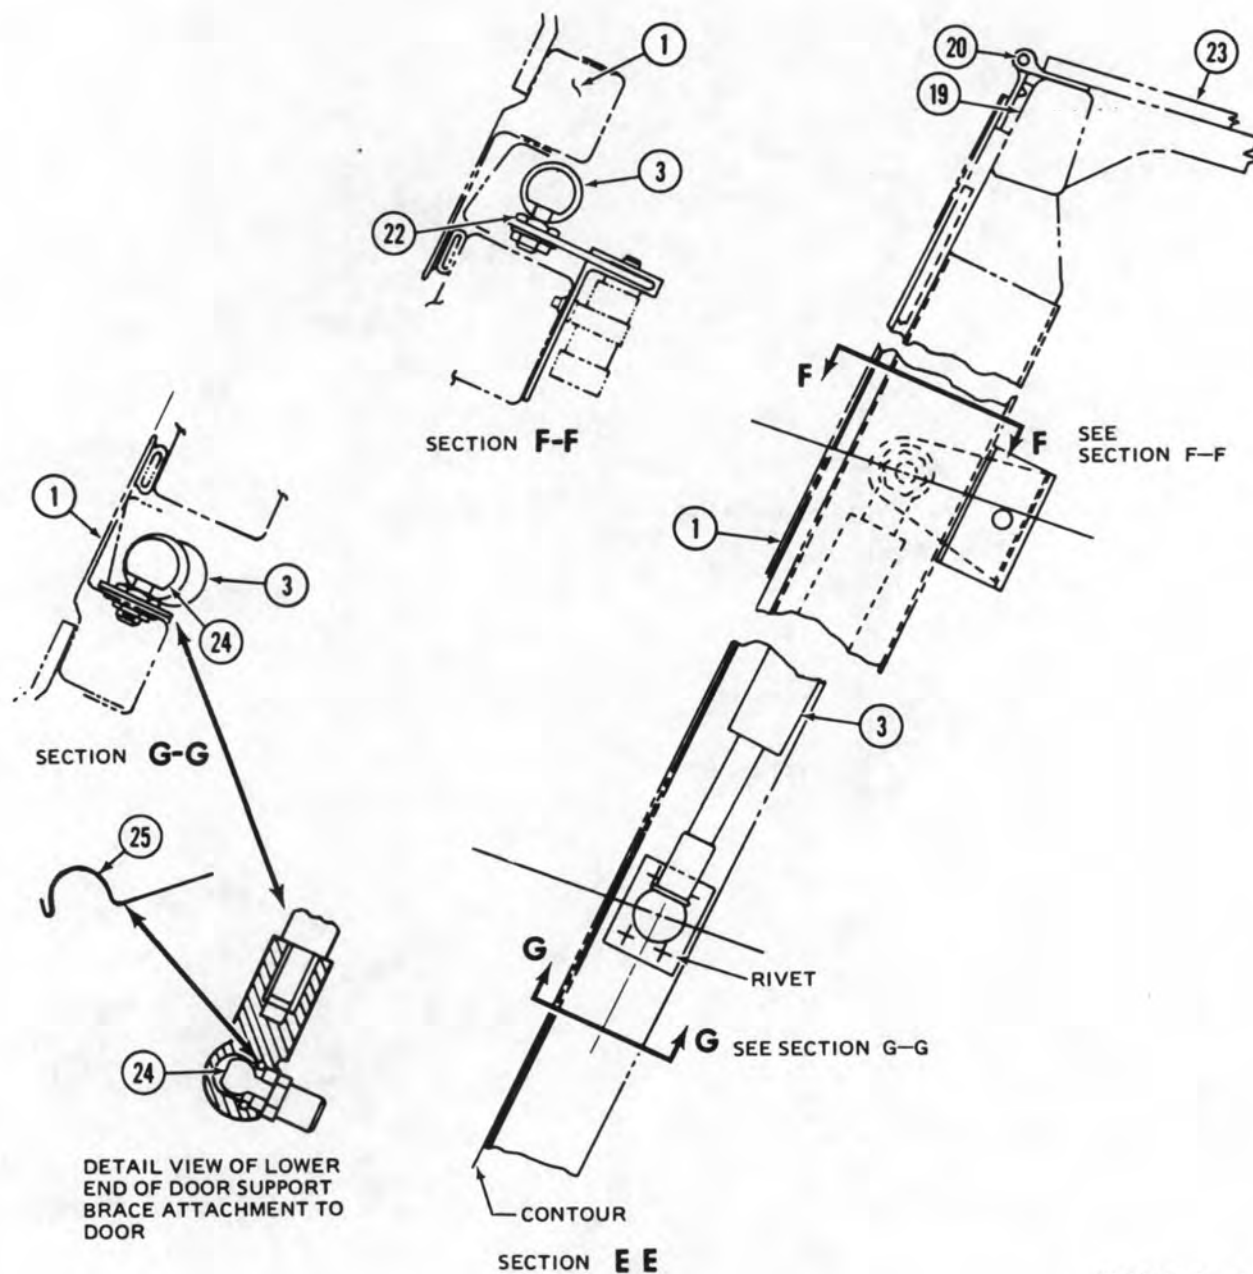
Gunner Door — Installation (Sheet 1 of 3)
